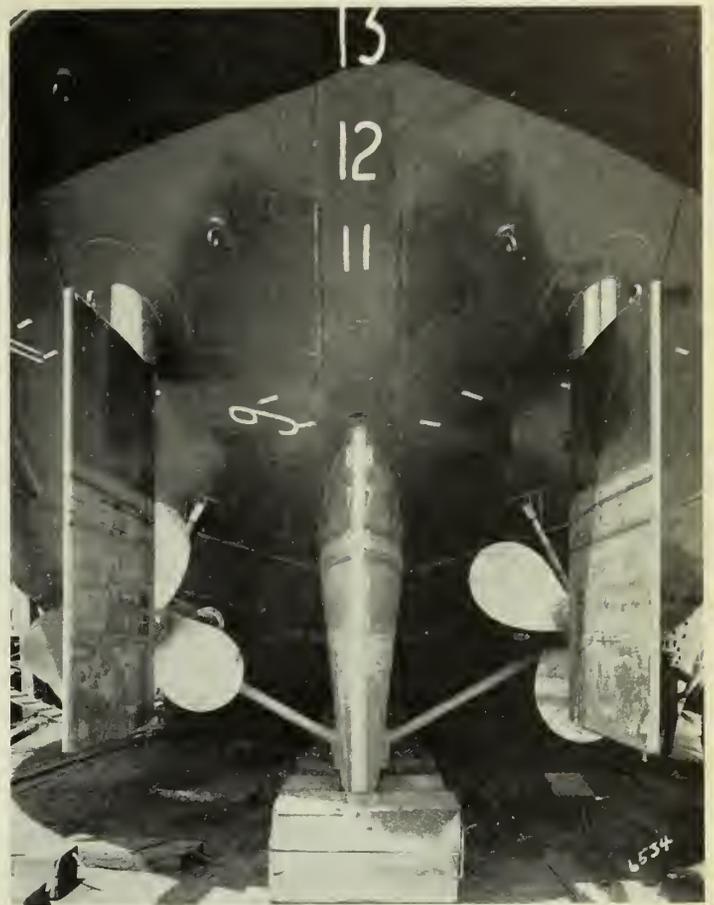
All Welded Oiltanker "Mercury," Stern View.
